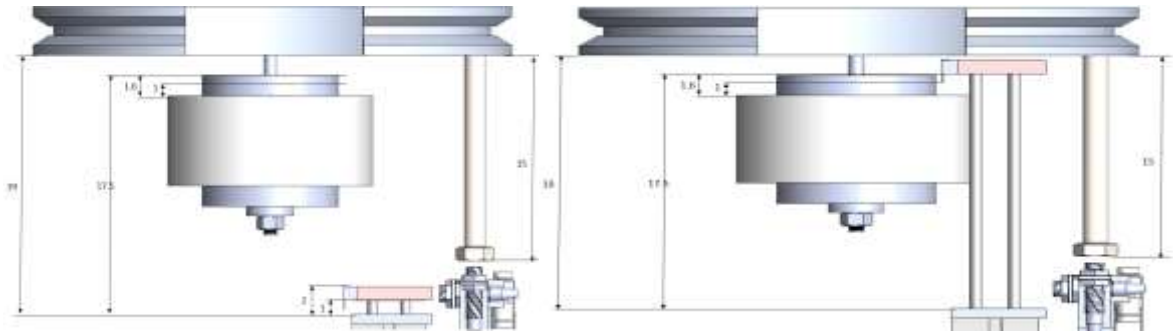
Start and end stroke positions of cylinder in PE film holding and cutting mechanism
